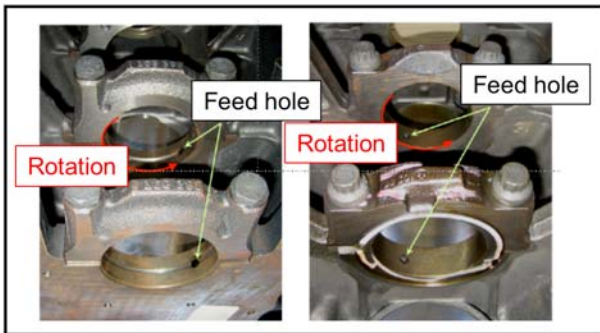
design examples for main bearing oil supply hole locations, BMW left, Mercedes-Benz (right), view from the engine pan upwards
